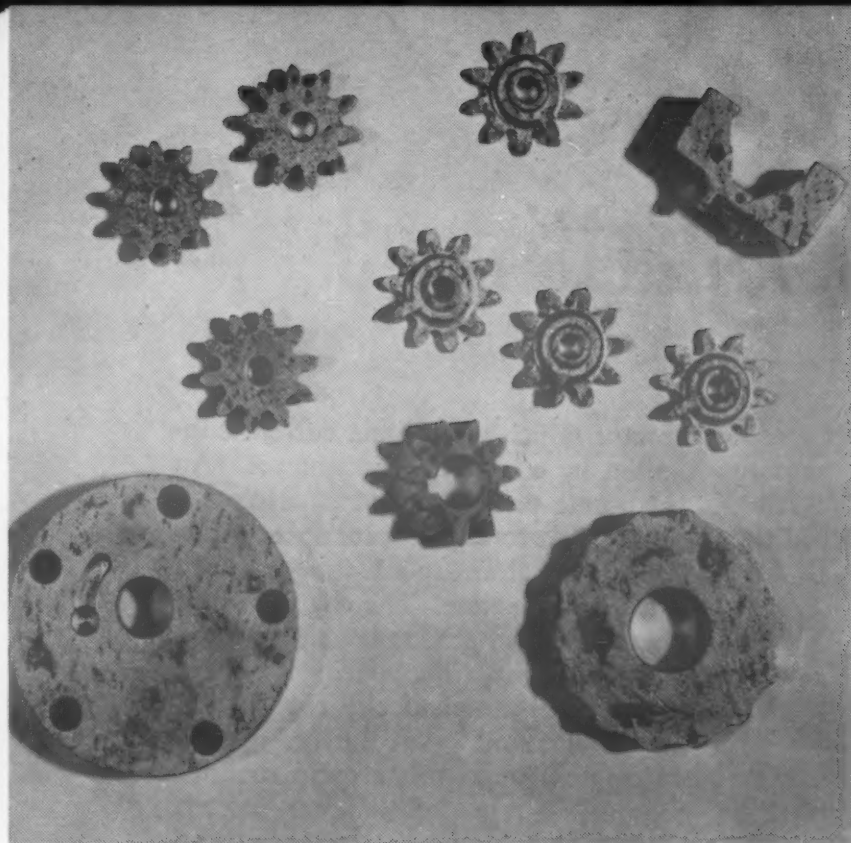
Sintered iron adding machine parts, cadmium plated without impregnation, show pitting after 10 days atmospheric exposure.
